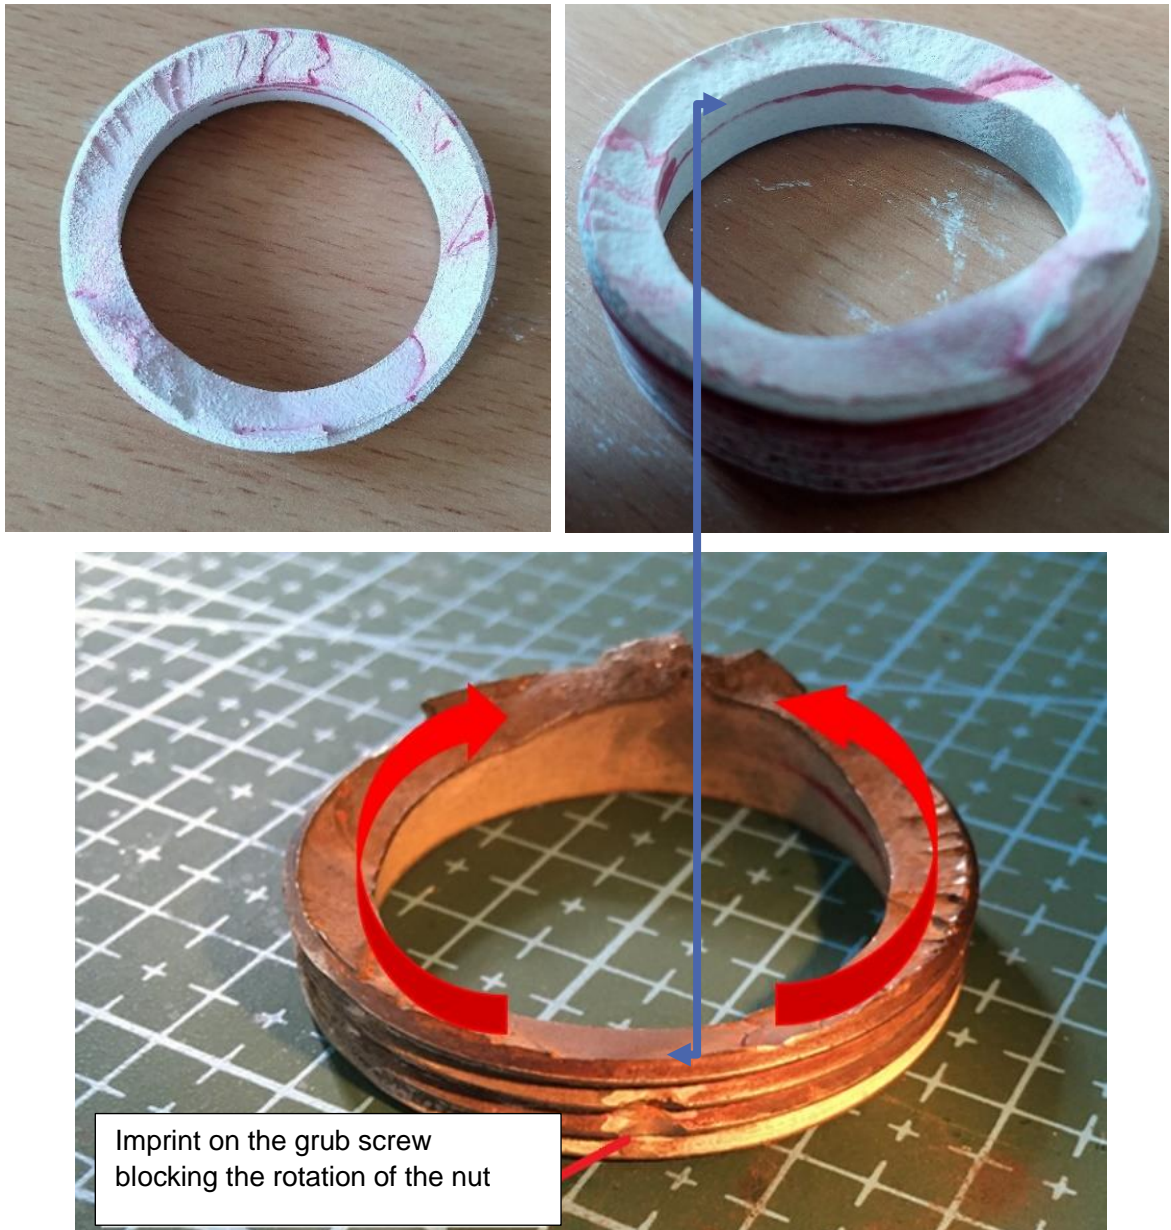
The results of the colour penetration method test – damaged element – clearly visible subsurface crack [source: Warsaw University of Technology]
